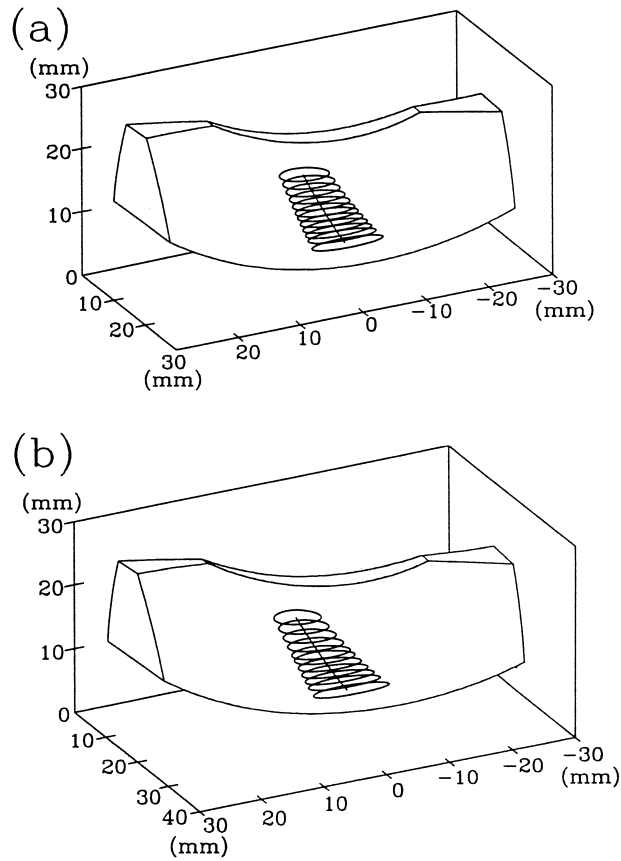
Bearing contacts and contact paths of the ZN-type worm gear set under different worm-thread number.
